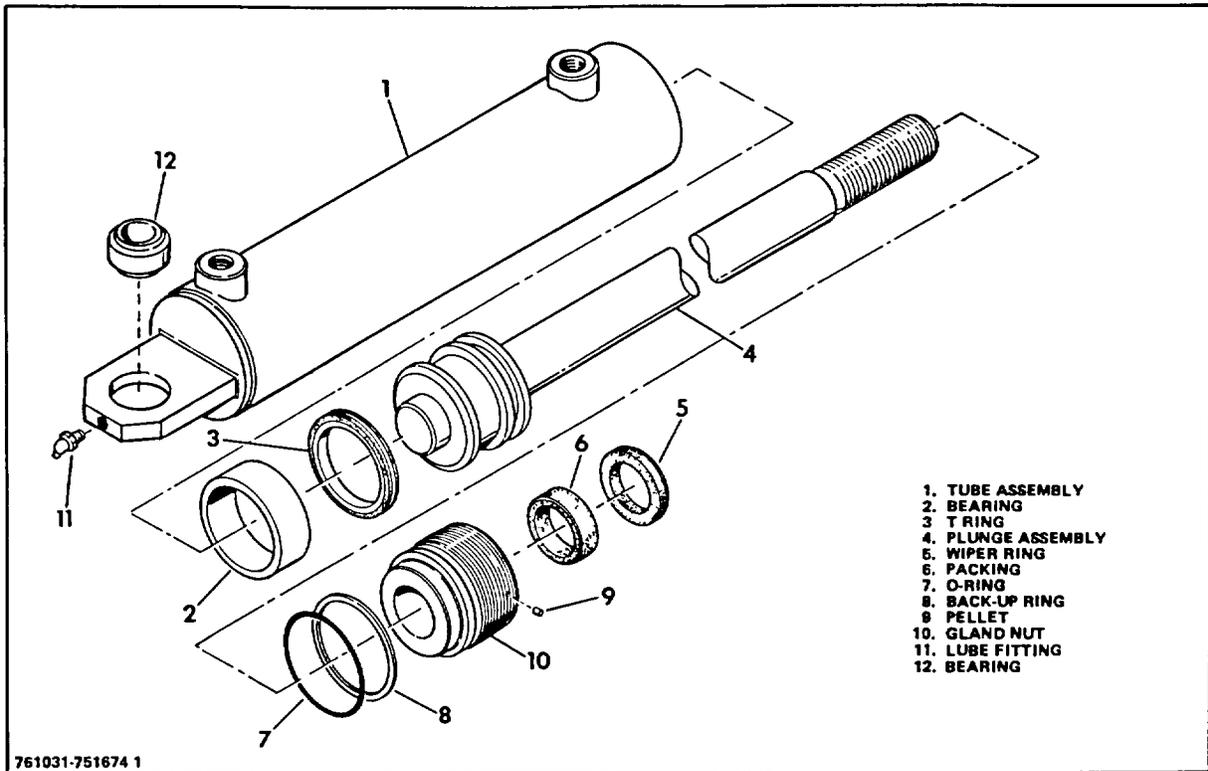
Power Steer Cylinder Assembly (Fixed Piston)
